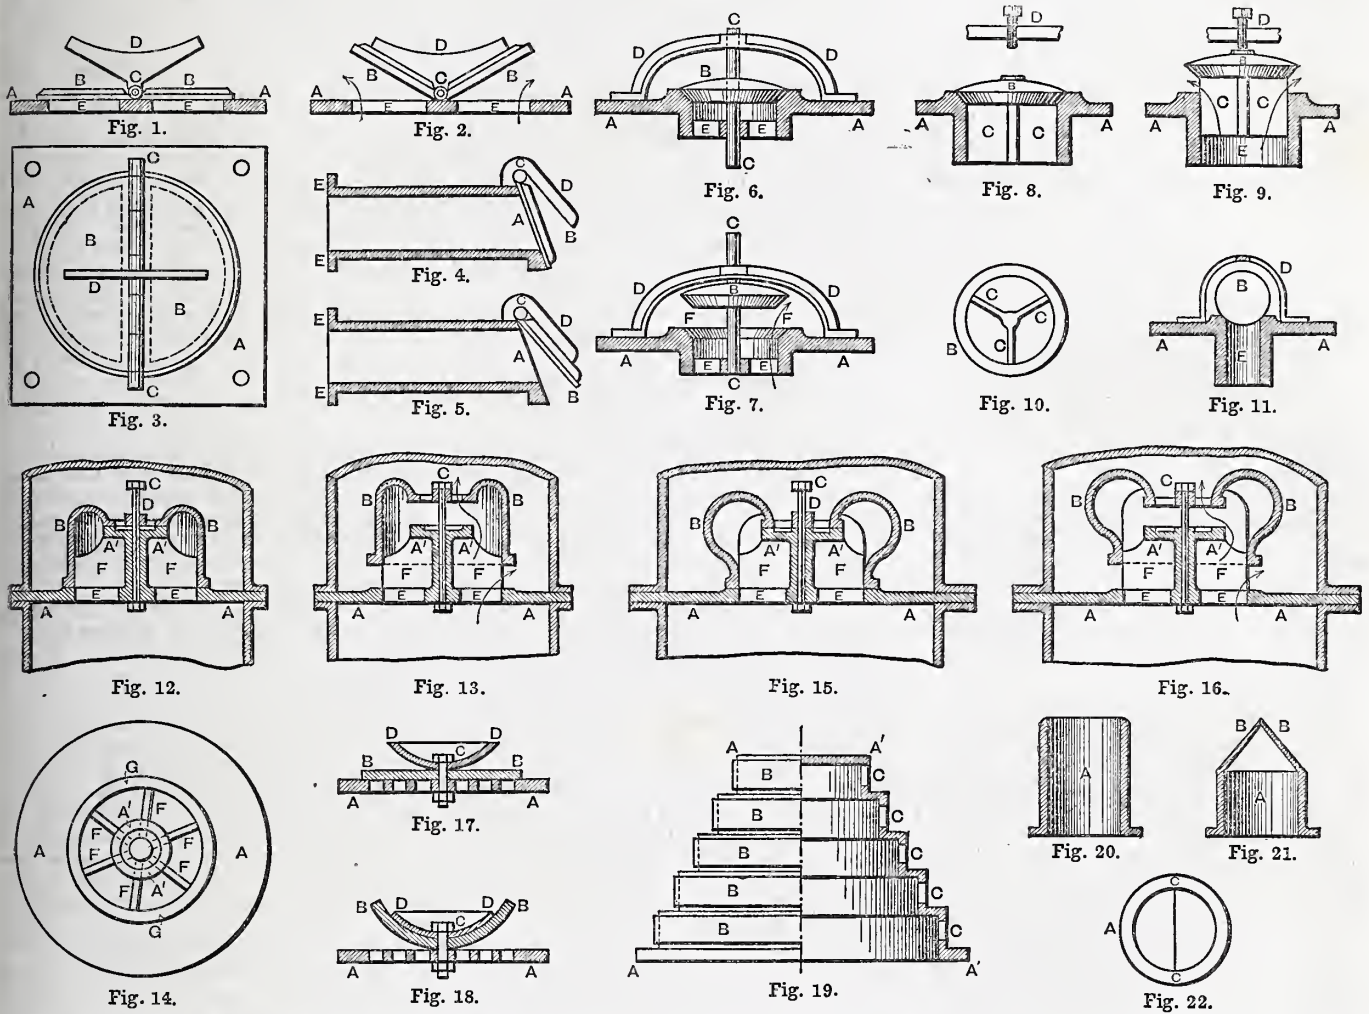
Butterfly Valve Shut: Seat in Section. Fig. 2.—Butterfly Valve Open: Seat in Section. Fig. 3.—Butterfly Valve: Plan. Fig. 4.—Flap Valve Shut: Seat in Section. Fig. 5.—Flap Valve Open: Seat in Section. Fig. 6.—Stem Valve Shut: Seat in Section. Fig. 7.—Stem Valve Open: Seat in Section. Fig. 8.—Stalk Valve Shut: Seat in Section. Fig. 9.—Stalk Valve Open: Seat in Section. Fig. 10.—Stalk Valve: Underside. Fig. 11.—Ball Valve: Seat in Section. Fig. 12.—Vertical Section of Double Beat Valve Shut. Fig. 13.—Vertical Section of Double Beat Valve Open. Fig. 14.—Plan of Seats of Double Beat Valve. Fig. 15.—Vertical Section of Crown Valve Shut. Fig. 16.—Vertical Section of Crown Valve Open. Fig. 17.—Flat Indiarubber Valve Shut. Fig. 18.—Flat Indiarubber Valve Open. Fig. 19.—Indiarubber Band Valve, half Elevation and half Vertical Section. Figs. 20 and 21.—Vertical Sections, at Right Angles to each other, of Indiarubber Semi-Lunar Valve. Fig. 22.—Plan of Indiarubber Semi-Lunar Valve.
